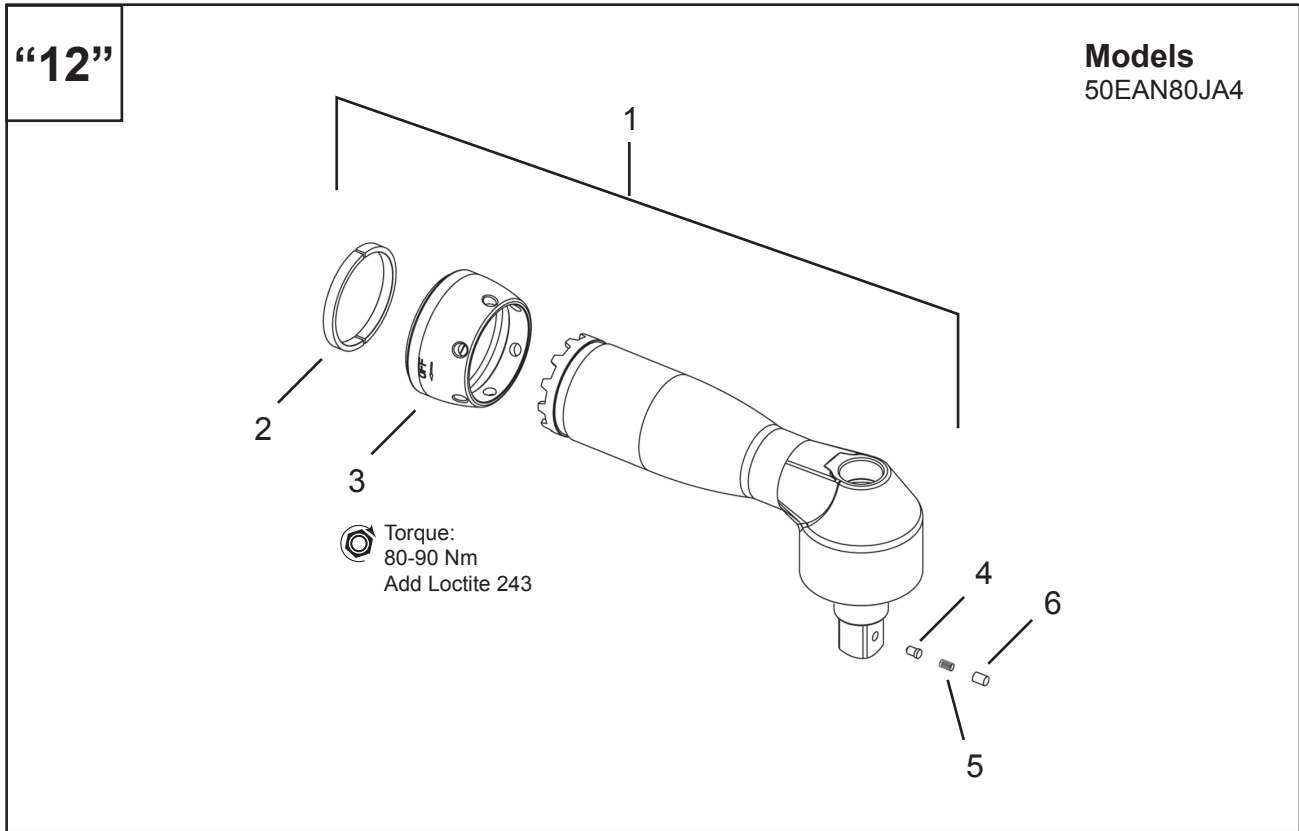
”: 302175PT Angle Head Attachment (JA4)
